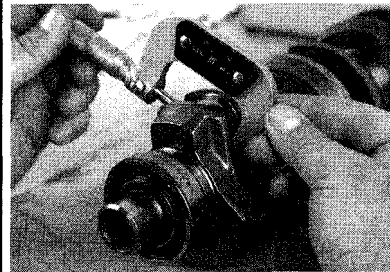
Measure the main bearing and crankpin surfaces using a micrometer
